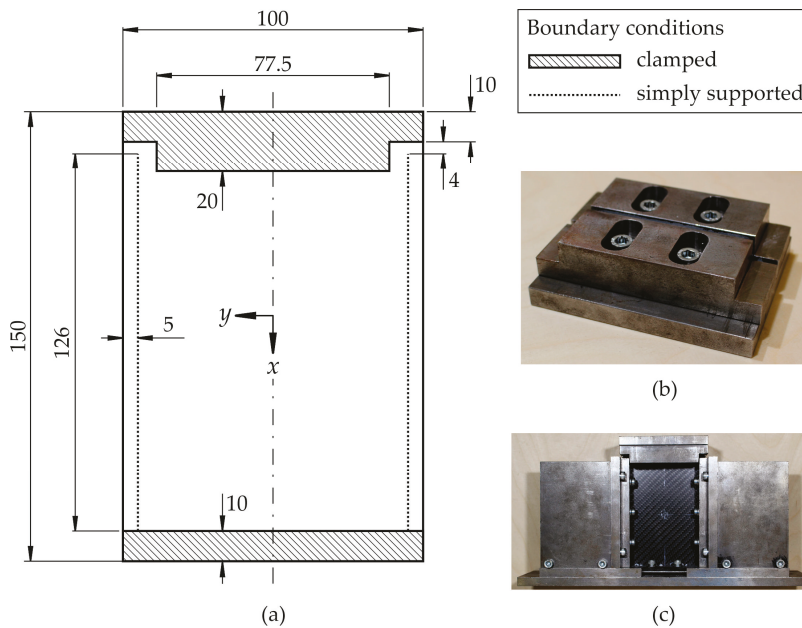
(a) Schematic fixture of composite plate (nominal dimension 100 mm \times 150 mm) within modified CAI test device, (b) top part of modified CAI test device and (c) schematic fixture after modification with integrated sample.
